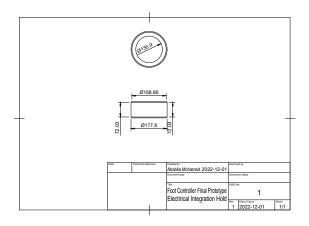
Foot Controller Final Prototype Electrical Integration Hold Technical Drawing
